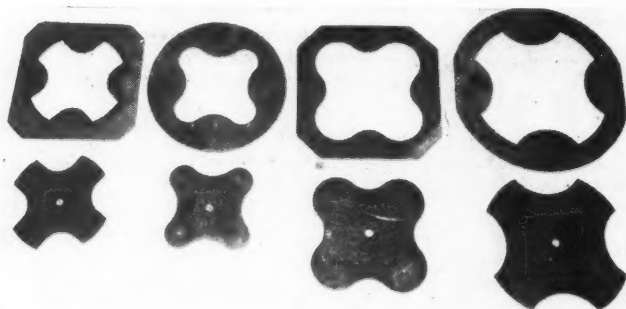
These steel templates show variety of pod shapes and sizes possible to machine using a horizontal boring machine equipped with hydraulic tracer-control attachment
